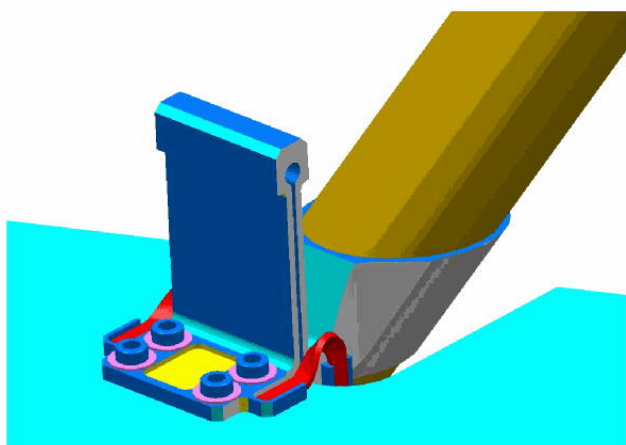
Flexible blade for groove attachment on cryo-struts
